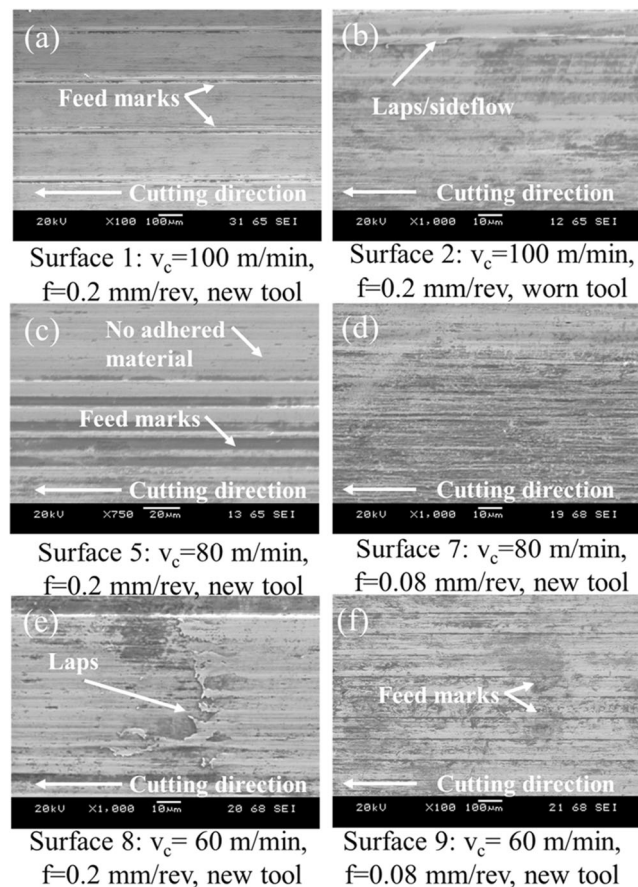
Images of the turned workpiece sample surfaces. a Surface 1: $v_c = 100$ m/min, $f = 0.2$ mm/rev, new tool. b Surface 2: $v_c = 100$ m/min, $f = 0.2$ mm/rev, worn tool. c Surface 5: $v_c = 80$ m/min, $f = 0.2$ mm/rev, new tool. d Surface 7: $v_c = 80$ m/min, $f = 0.08$ mm/rev, new tool. e Surface 8: $v_c = 60$ m/min, $f = 0.2$ mm/rev, new tool. f Surface 9: $v_c = 60$ m/min, $f = 0.08$ mm/rev, new tool.
